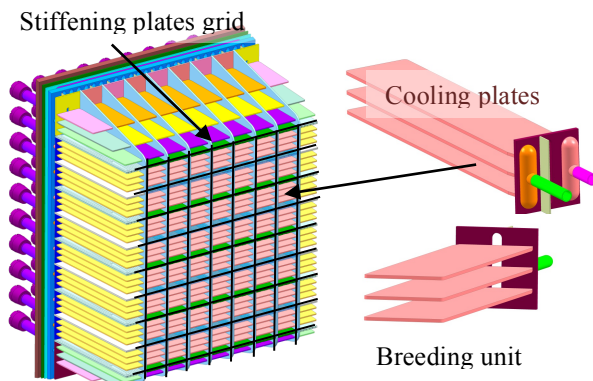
Isometric view of the inner structure of the equatorial outboard blanket module (left) and detail of a single breeder unit (right)
